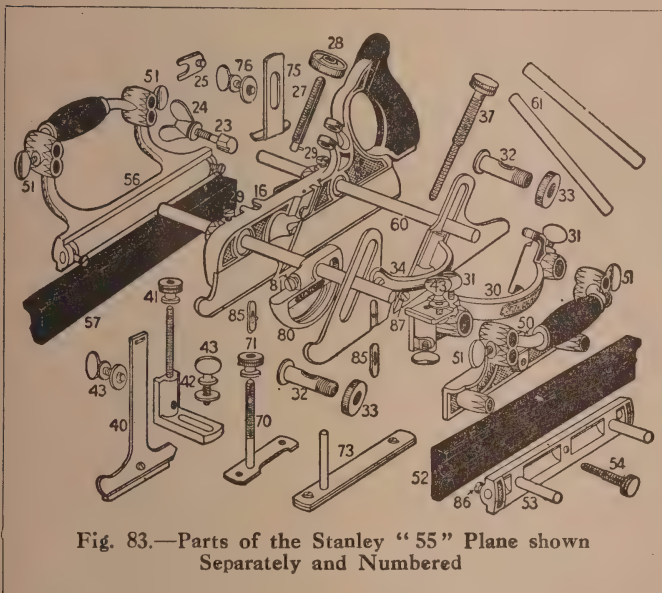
Parts of the Stanley "55" Plane shown Separately and Numbered
